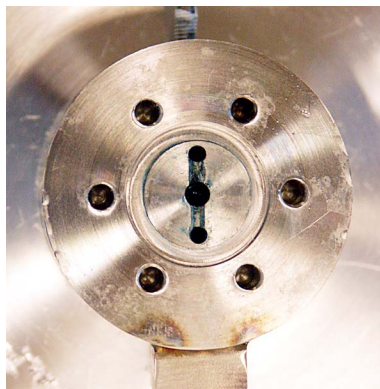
The face of the drug cylinder. Note the o-ring groove. The circle of holes outside of the groove are mounting holes for the nozzle.
